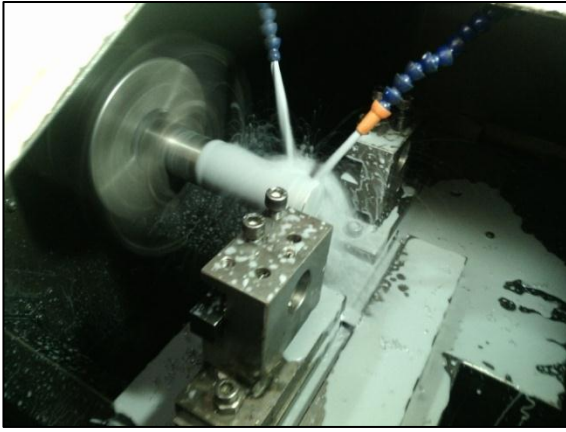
Turning of AISI304 work piece material on CNC lathe under coolant.
